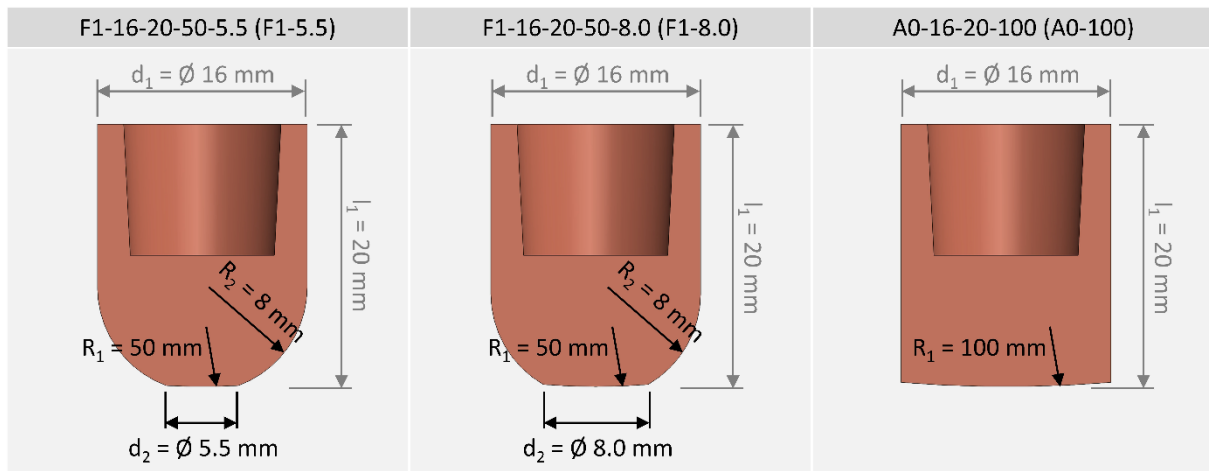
Dimensions of investigated resistance spot welding electrodes.
